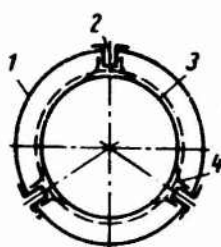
Diagram of front attachment of flame tube: 1 - casing; 2 - tube; 3 - flame tube; 4 - sleeves.
